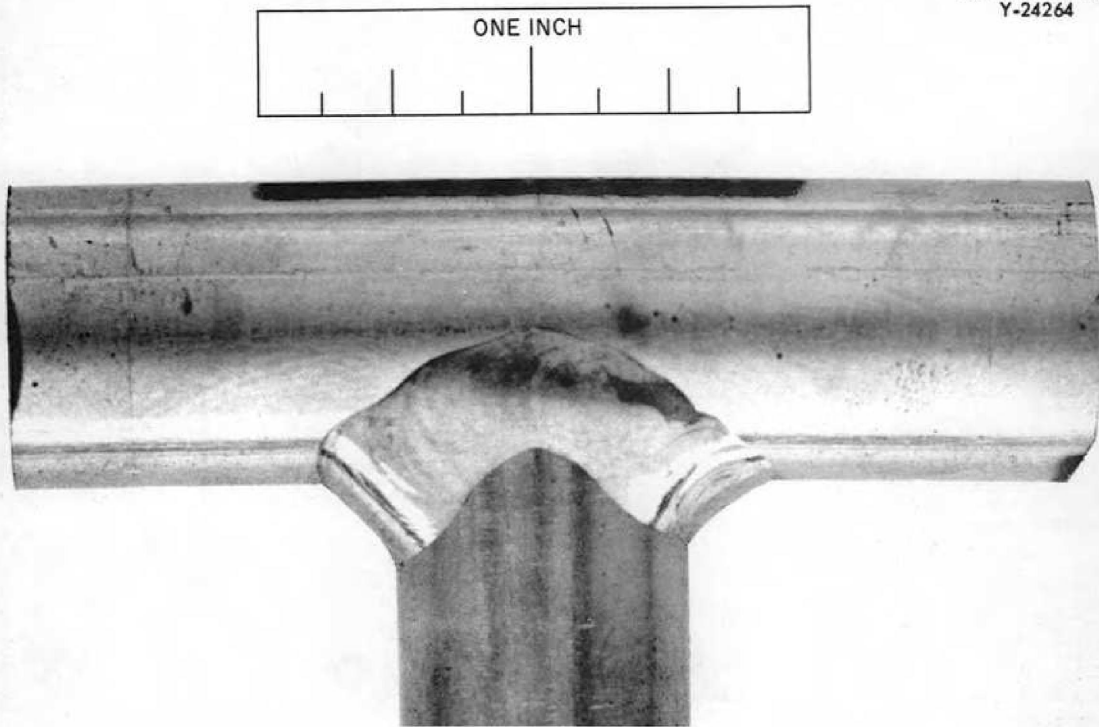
Niobium Saddle Weld Made with 85% Zr-15% Nb Filler Wire. 3X.
